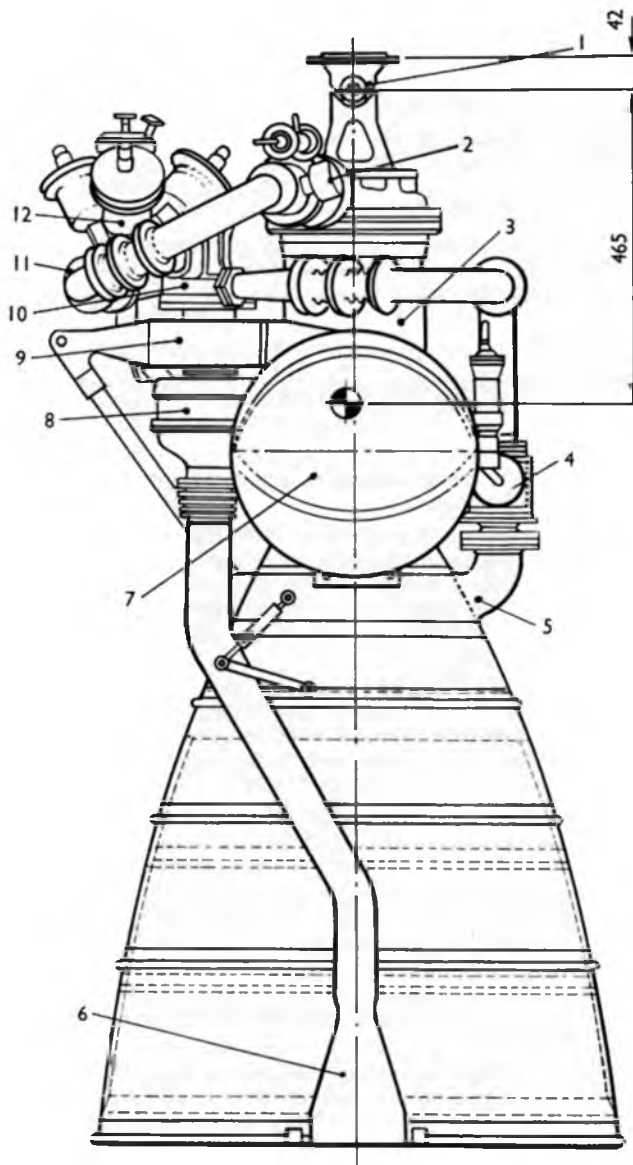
Hydrogen fuelled rocket engine for ELDO B launcher.
